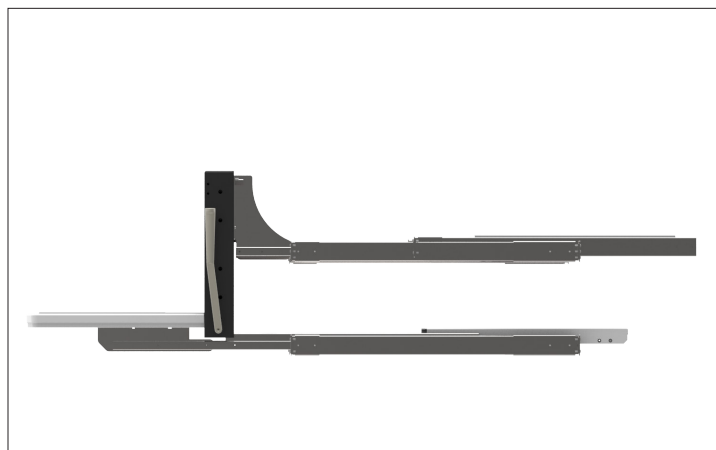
Figure C. The brackets will be securely attached to the slides after the mounting screws are installed.
